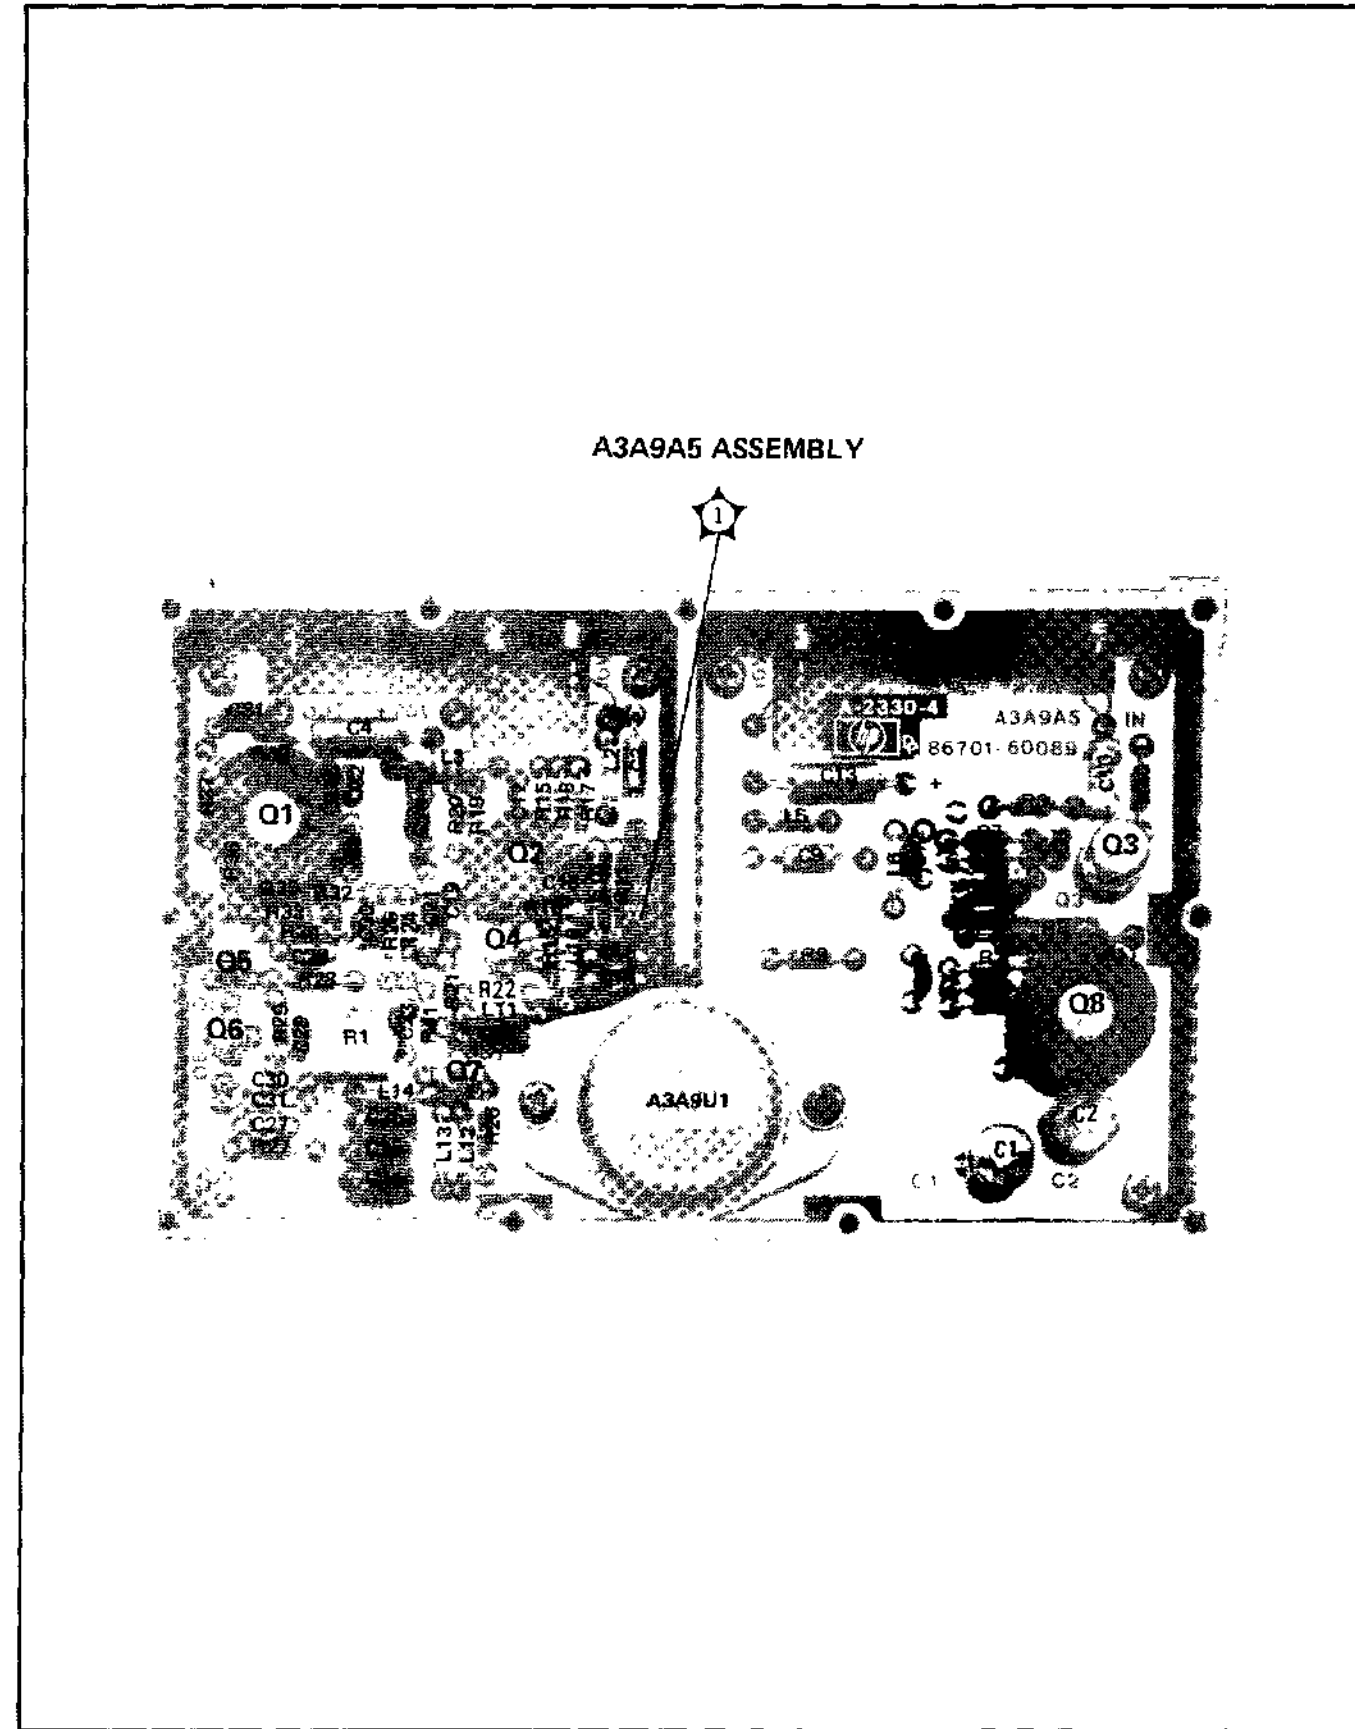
B2. A3A9A5 Sampler Assembly Component and Test Point Locations
